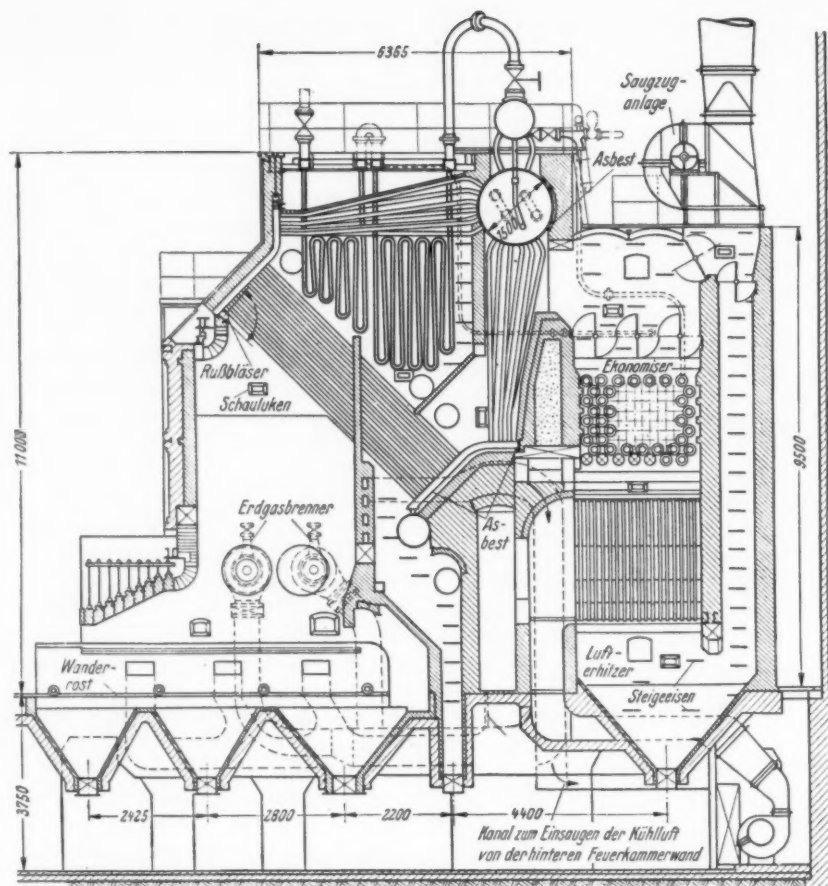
DOEBLER BOILER, 23 ATM 450 C
